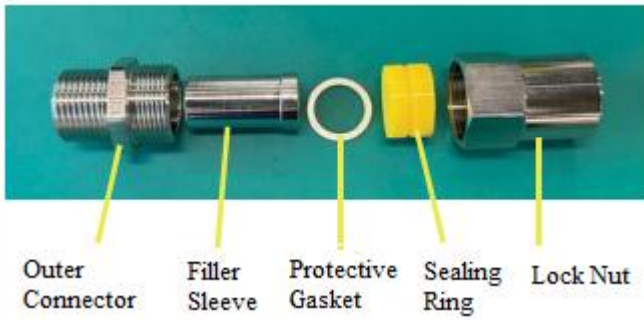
WT-T series explosion-proof cable installation device with packing seal
